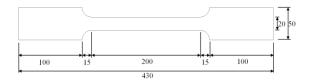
Specimen dimension details (in mm) of tensile test for beam and column sections¹⁵
